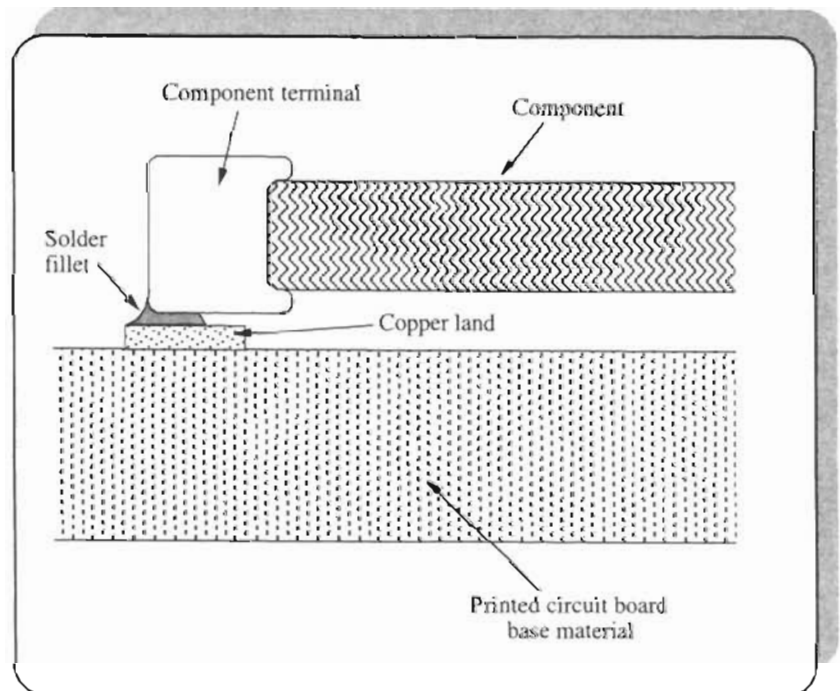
Rigid lap joint, formed when soldering a two-terminal chip surface mounted component
